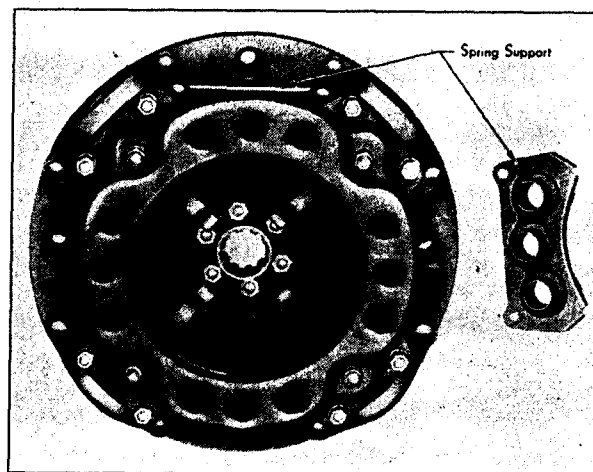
View of 355-D and 370-D clutch showing the new spring supports
